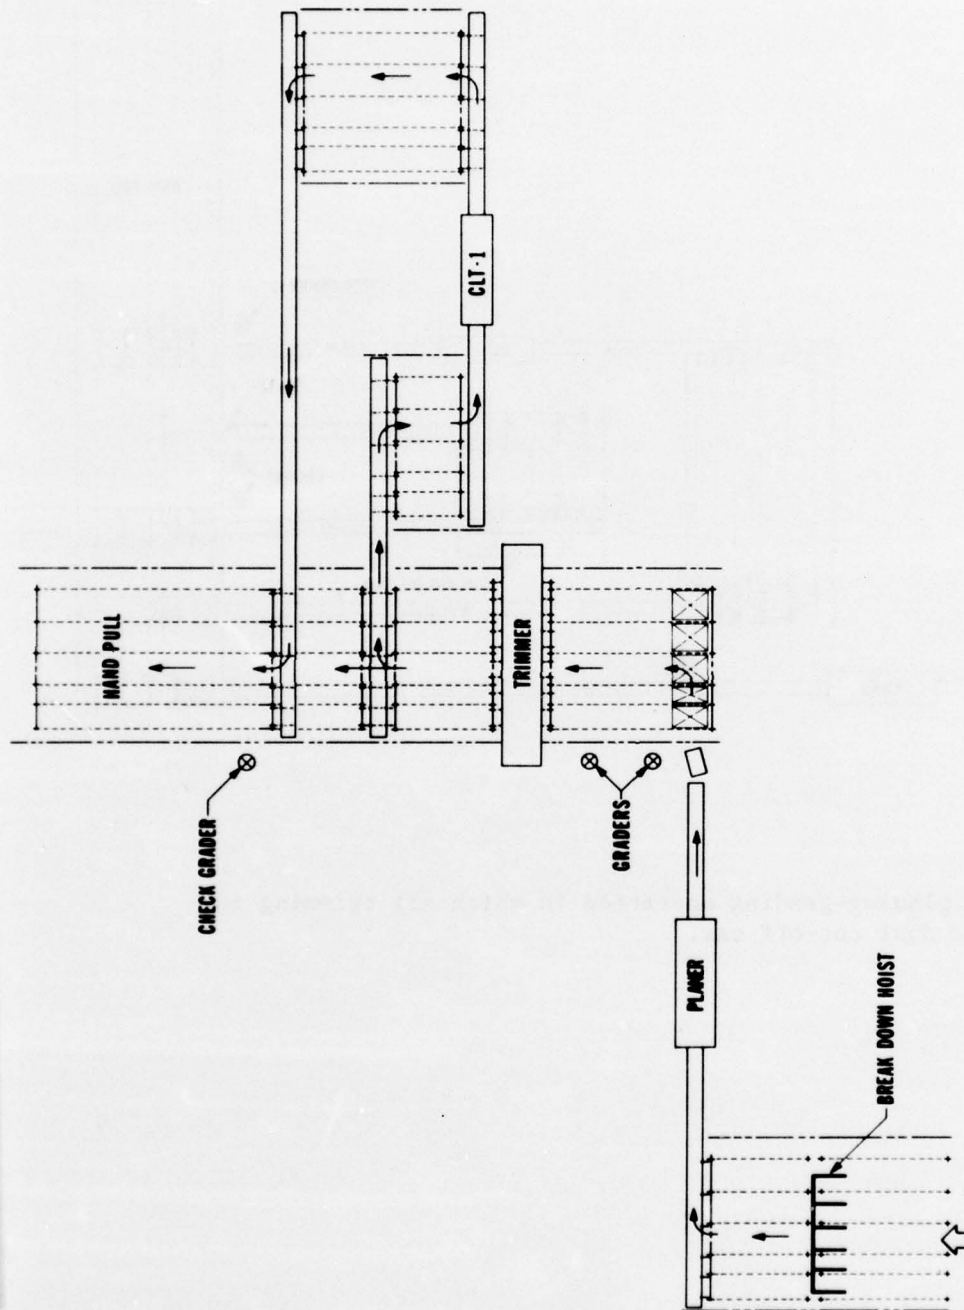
A grading arrangement illustrating a variation in equipment for routing lumber from the dry chain through the grading machine and back to the check grader.
